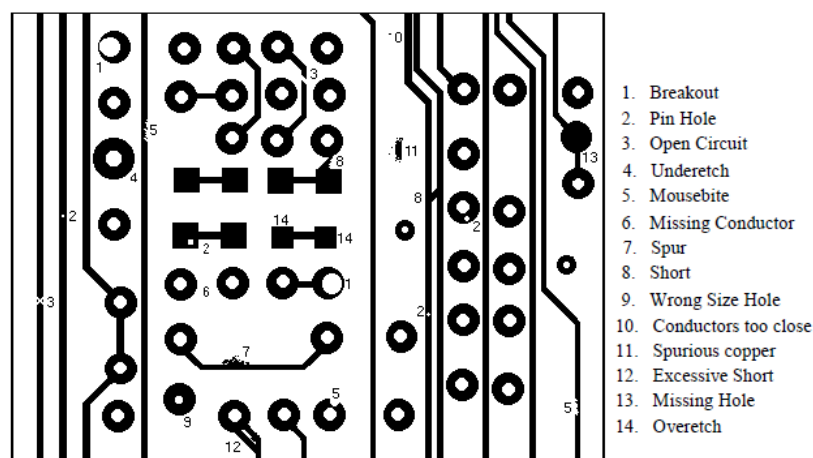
Example of defective PCB pattern, taken from [10]
